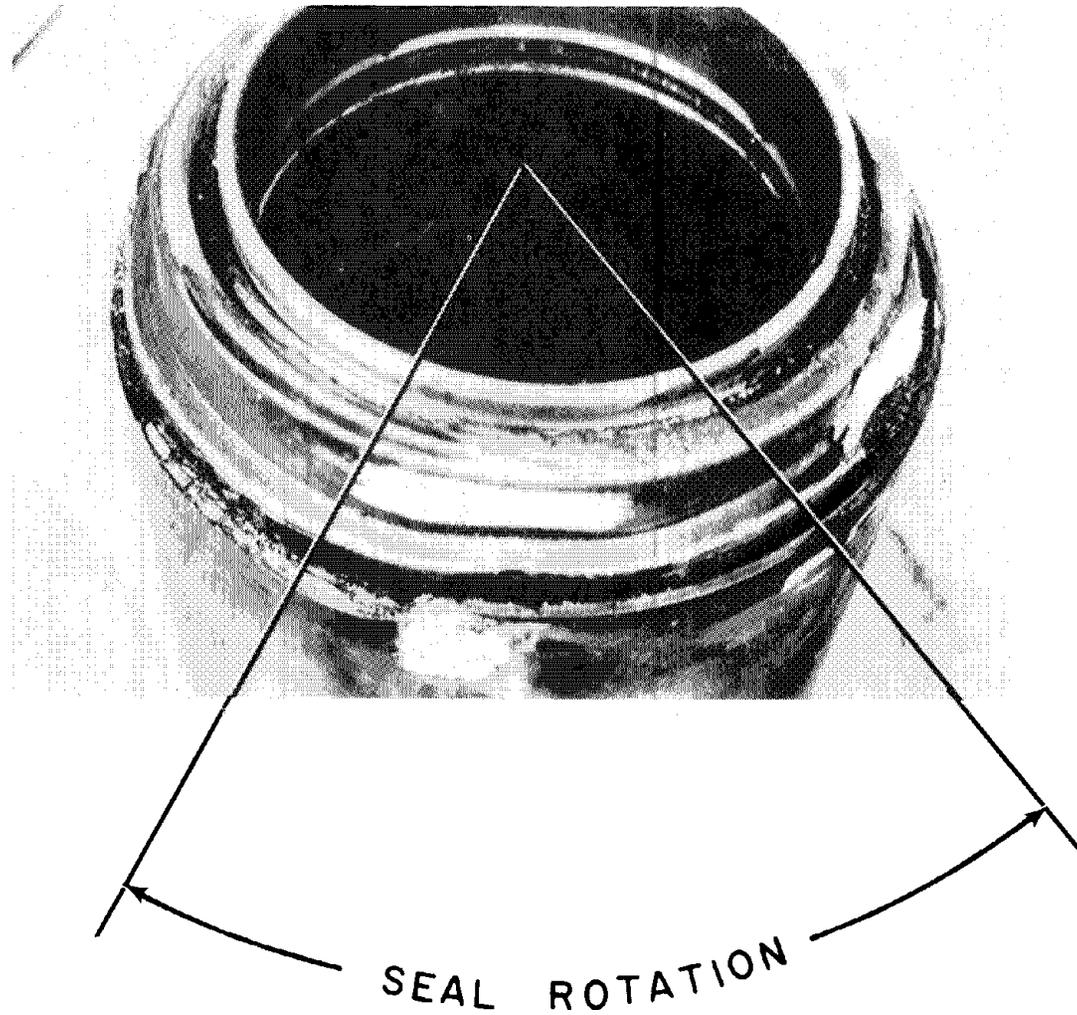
BEARING FP-6 AFTER 69.5 TEST HOURS SHOWING ROTATED AND COCKED SEAL
